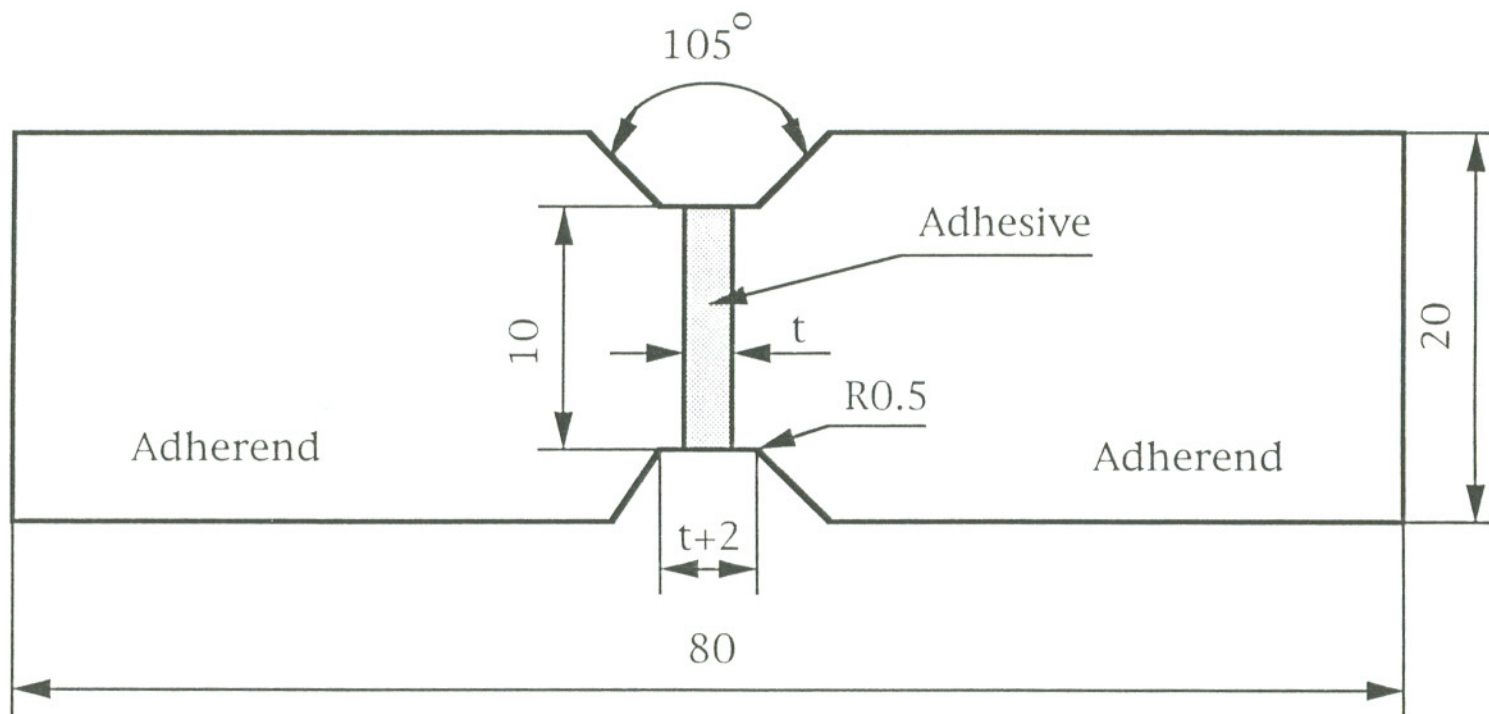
Schematic of Type A adhesive joint Iosipescu specimen.
